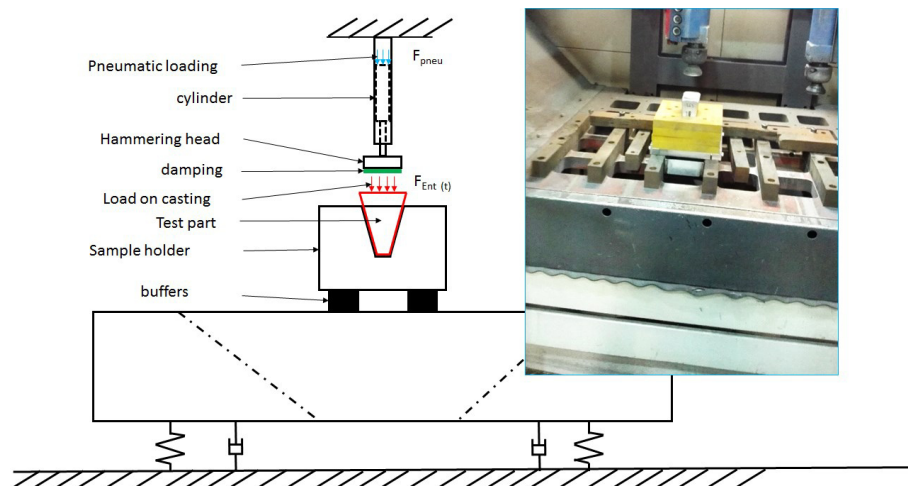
Schematic description of the pneumatic hammer used for core removal [174]. The PP-sample holder and upper part of test casting are put on the core removal station. Below the sample holder the sand collecting tray is positioned.
